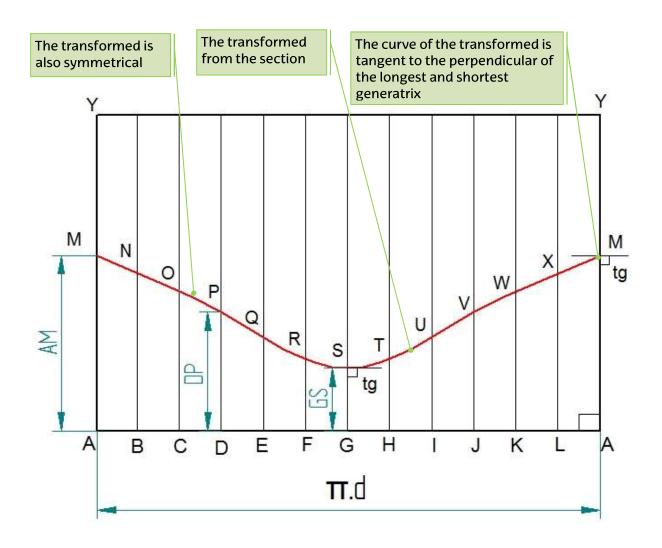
Method for drawing the transformed of a straight cylinder (Image made with Solid Edge)
